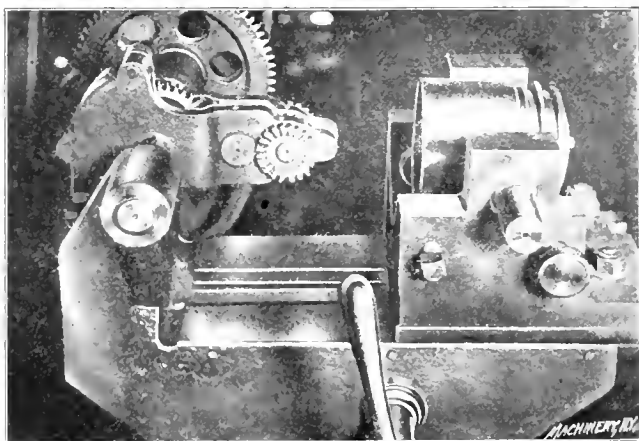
Special Machine for Milling the Space between the Wrist-pin Bosses
